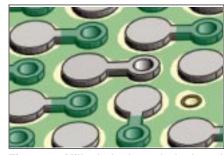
Mill a hole through the board and insert a Teflon sleeve.
